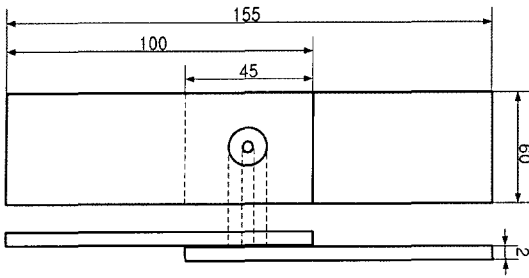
lap-joined for tensile shear test specimen by PFSW
